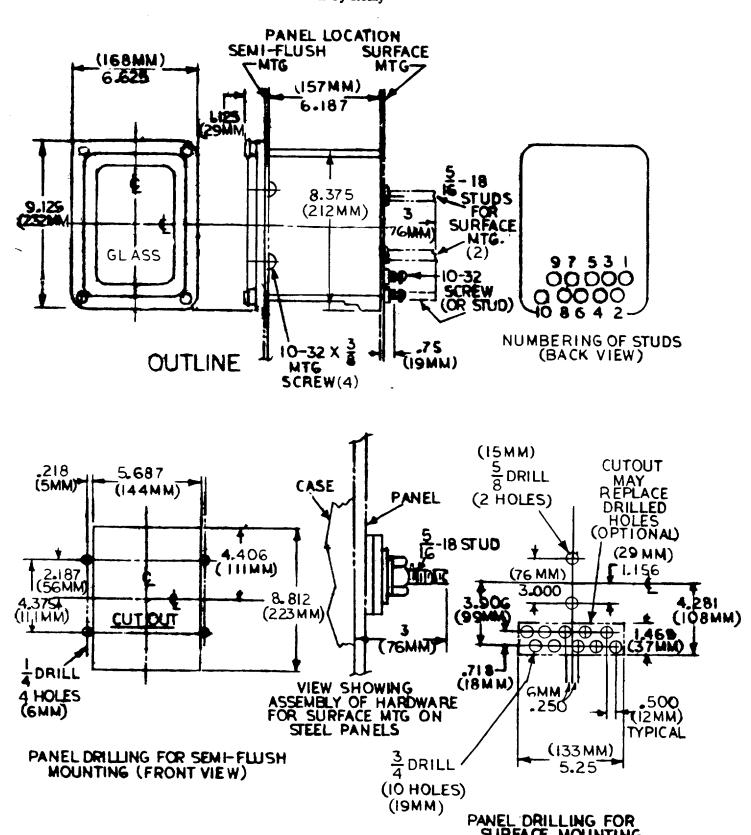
Outline and Panel Drilling Dimensions For Type HGA14AH Relay
